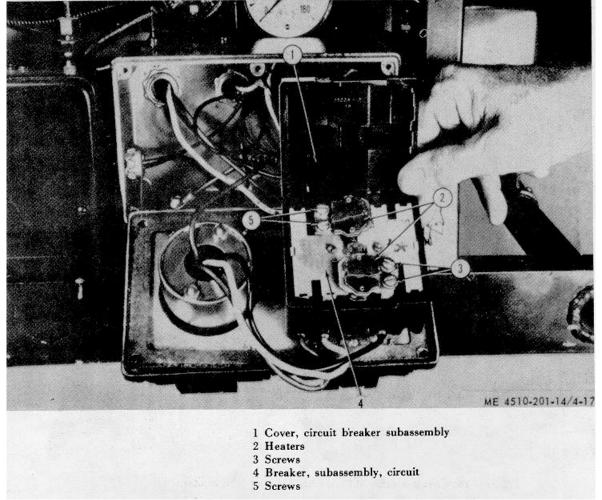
Circuit breaker subassembly cover opened to show overload heaters.
